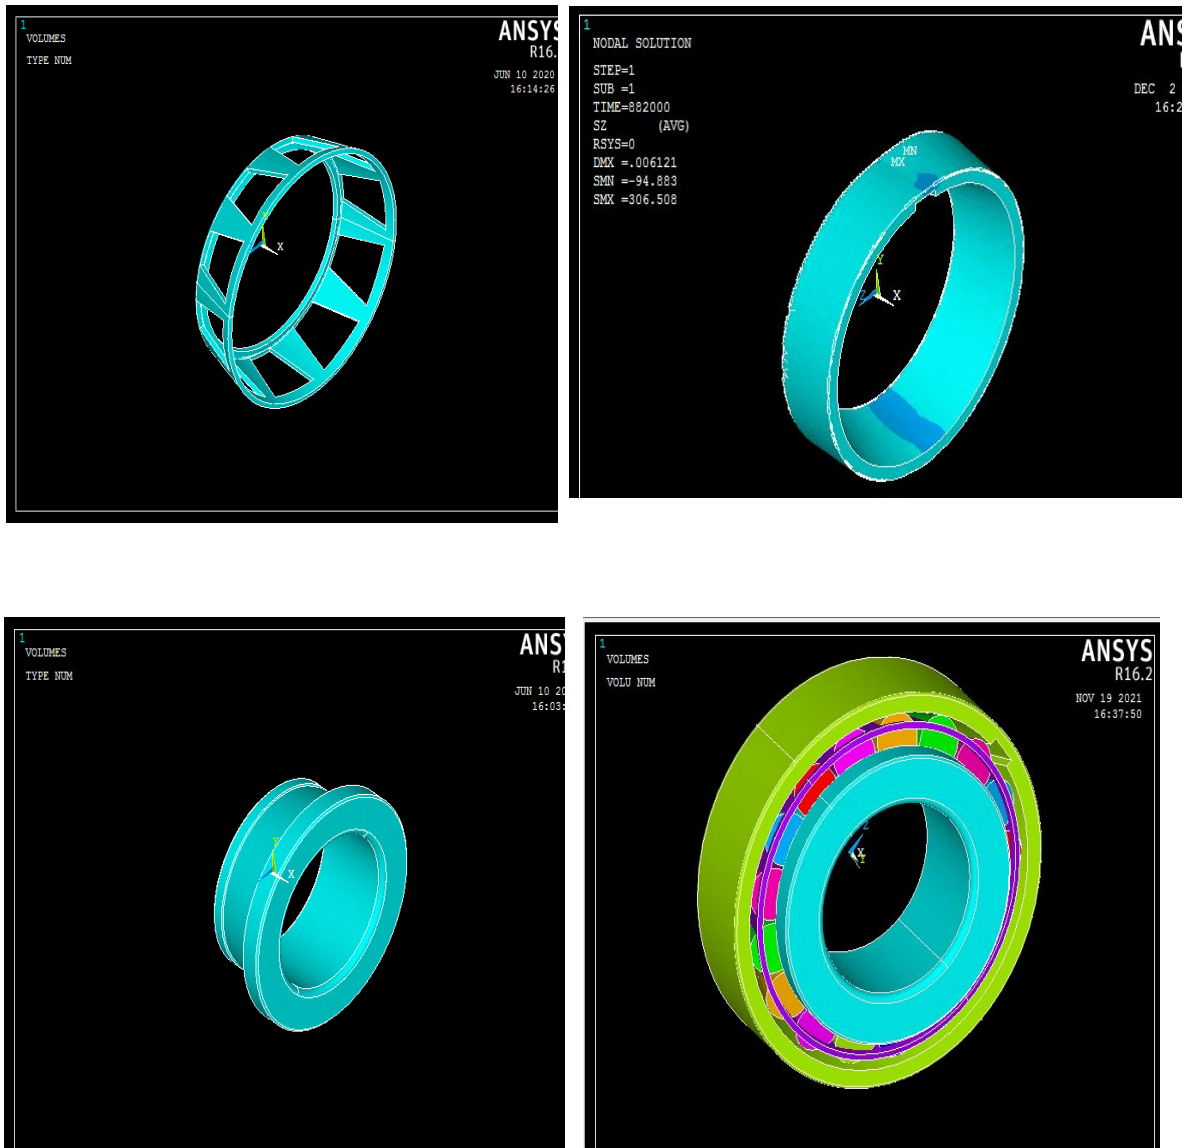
9 Taper roller bearing parts inner race, defective outer race, cage and assembled model
